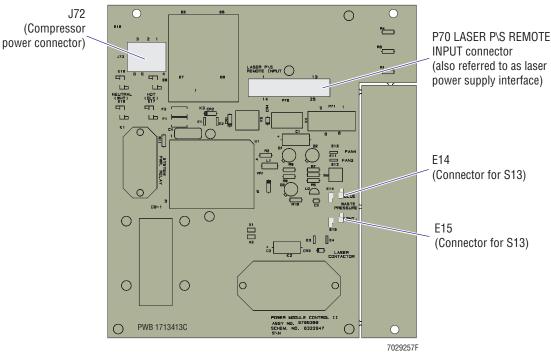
Power Module Control II Card (EMC Version) - Component Locations
